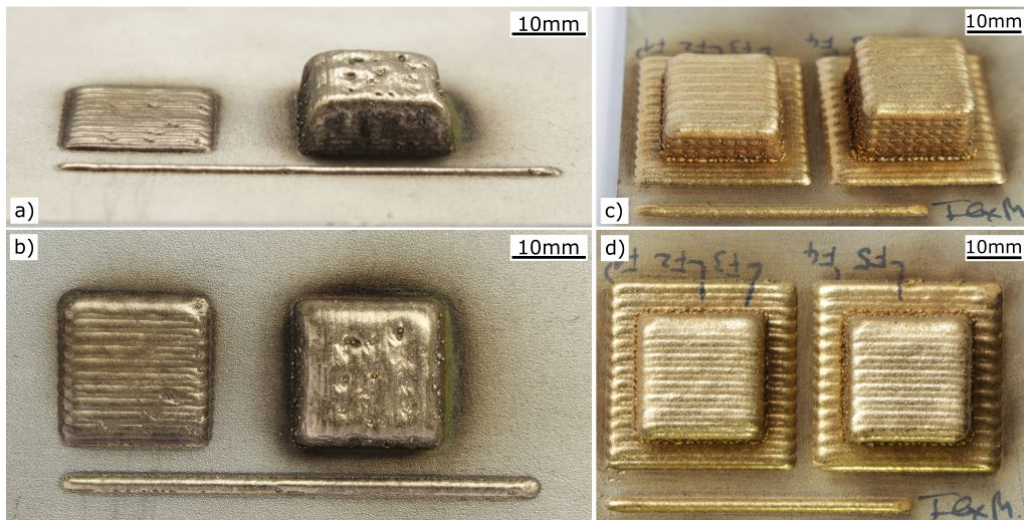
Manufactured specimens from sieved grinding material (a and b); Specimens from commercial DED powder: single weld track, cube with 10 layers, cube with 20 layers (c and d).
